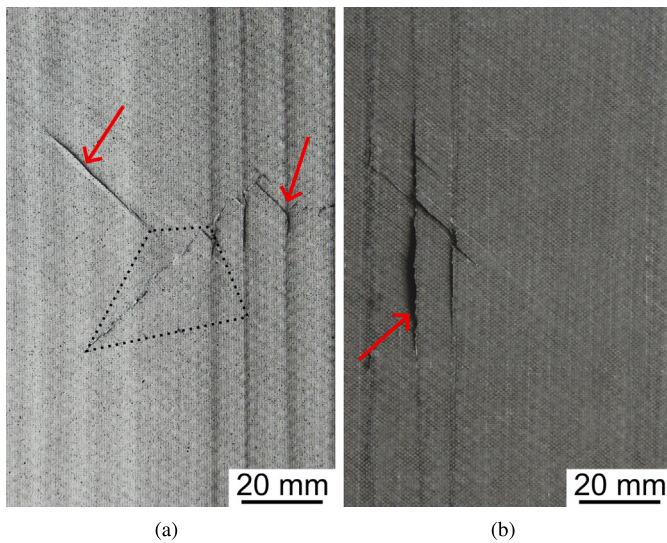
(a) impact and (b) back sides views of Taper45-600-5 specimen.
